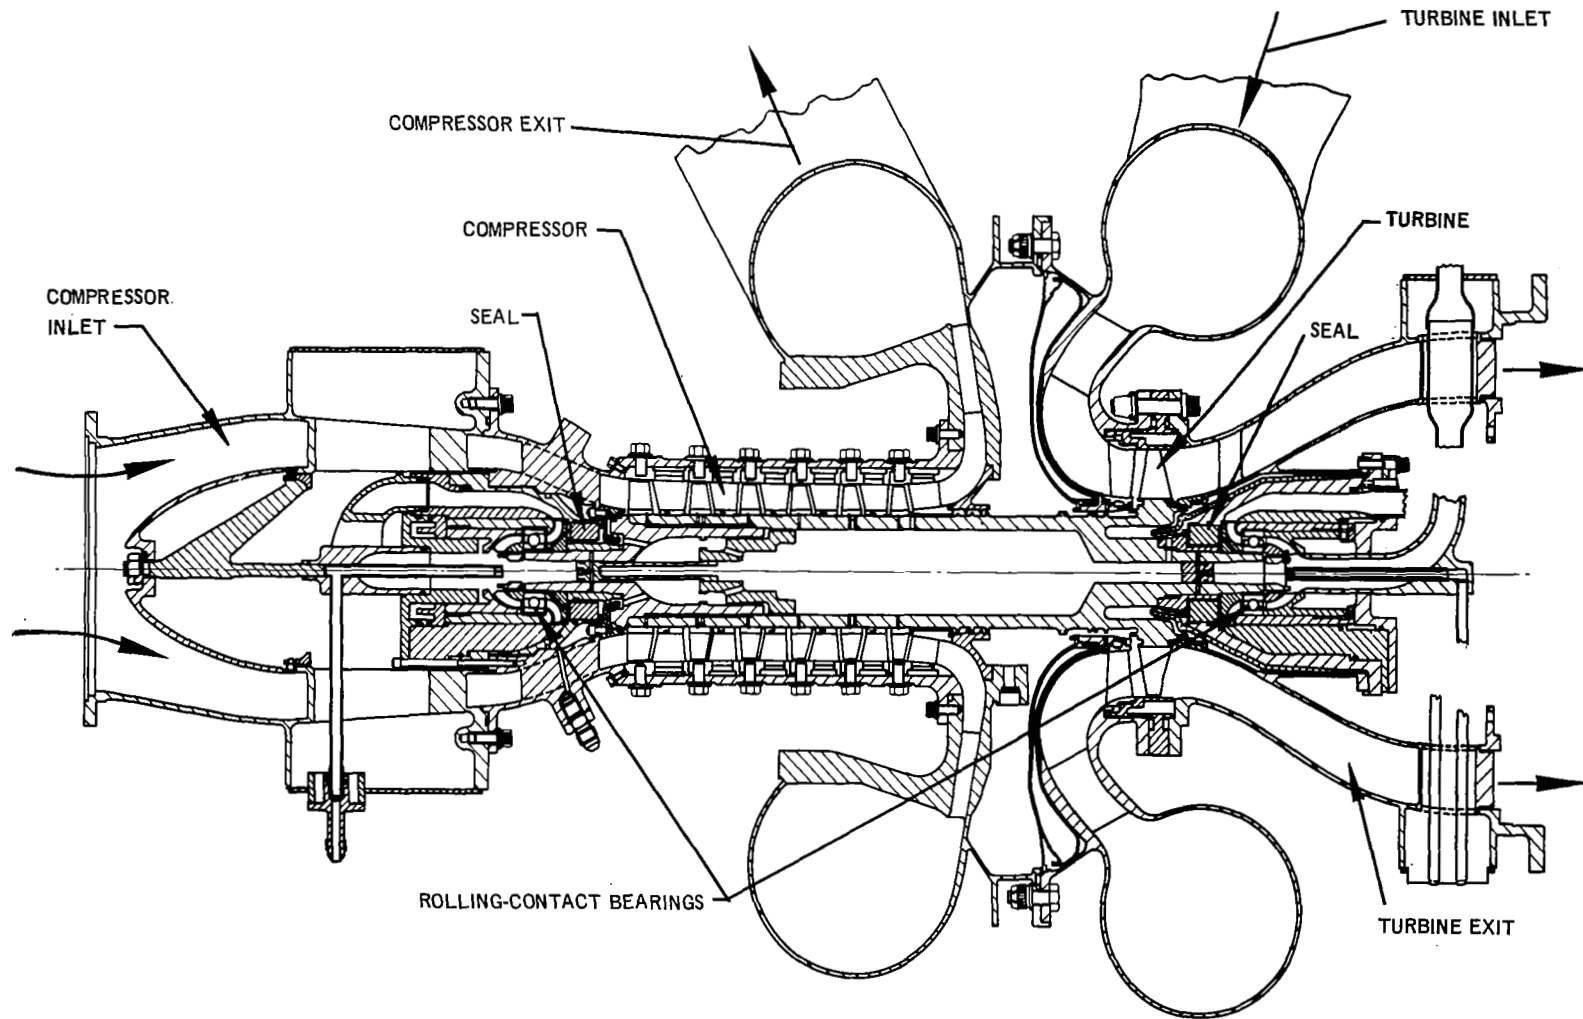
Brayton-Cycle Turbine-Compressor with Rolling-Contact Bearings
